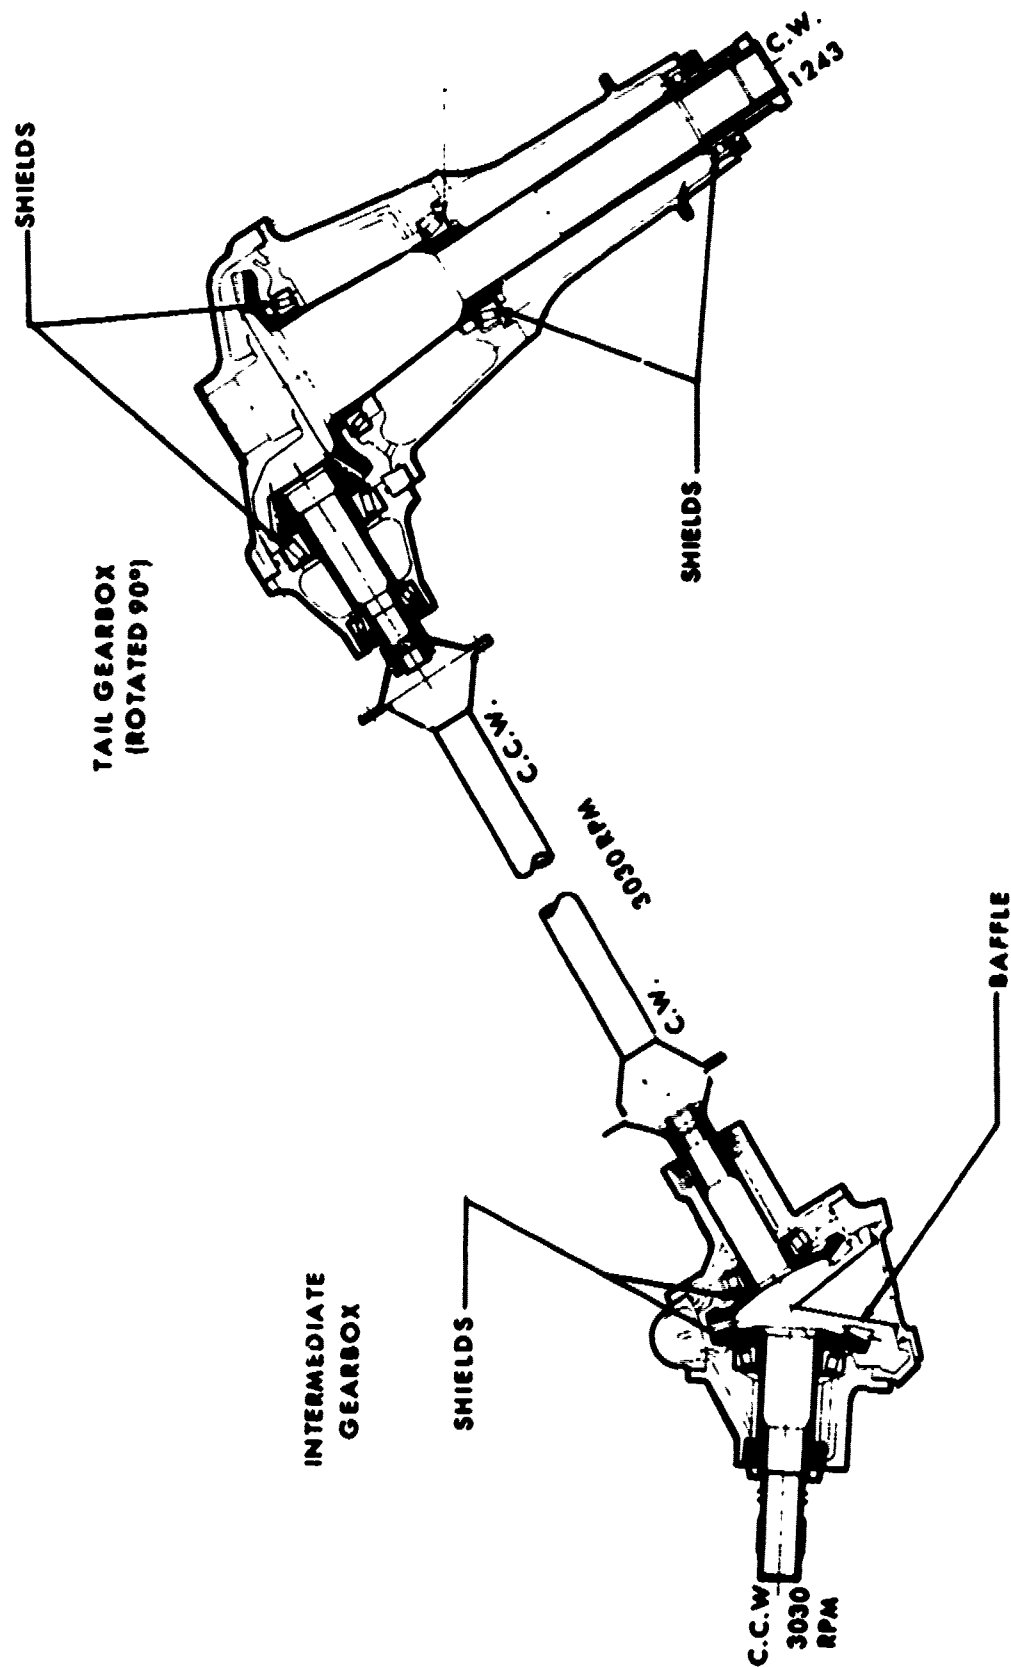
Tail and Intermediate Gearboxes, Grease Lubricated
